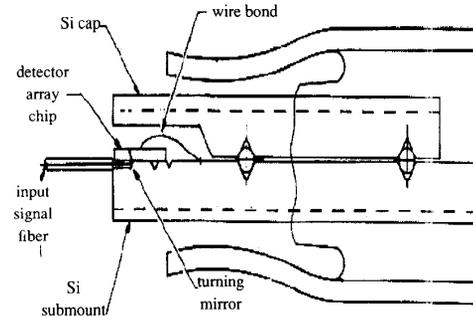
1D-ODL receiver optical subassembly (cross-sectional edge view).
